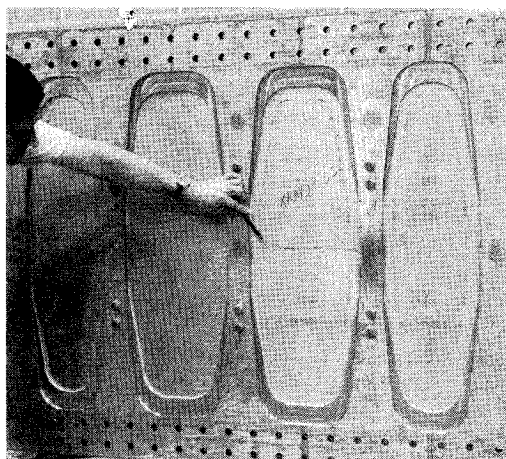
Braze fail-safe titanium specimen after application of 3,000,000 lb ultimate load.
